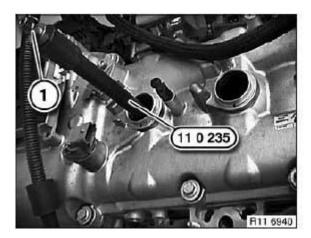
Identifying Special Tool 110 235 Courtesy of BMW OF NORTH AMERICA, INC.
